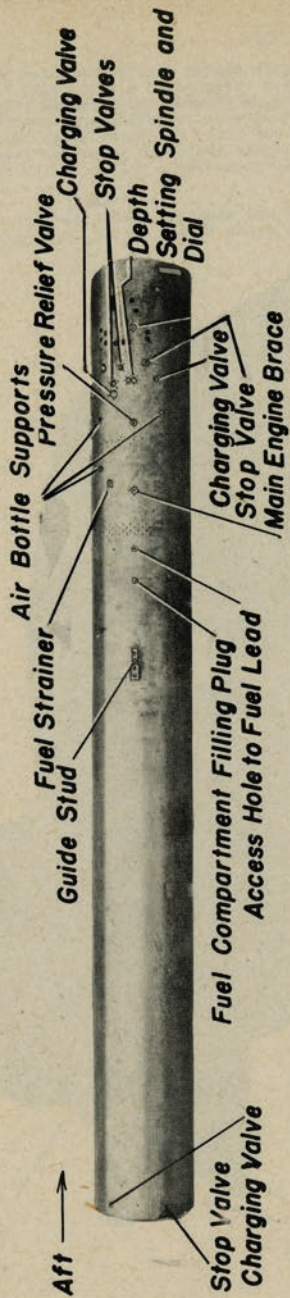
Torpedo Type 93 Model I Mod 2, Flask Section, Top View
